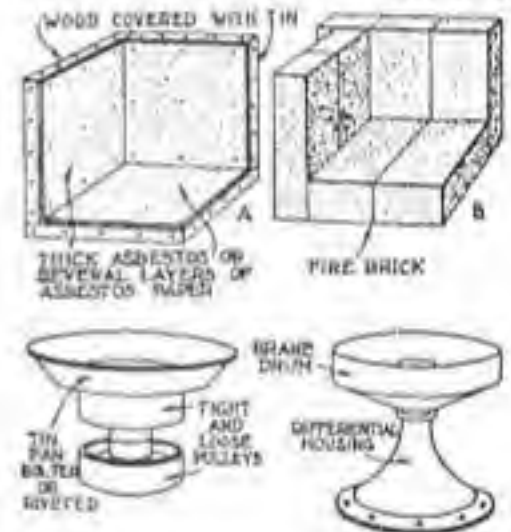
Two ways of making a soldering box, and two turntable soldering stands.
